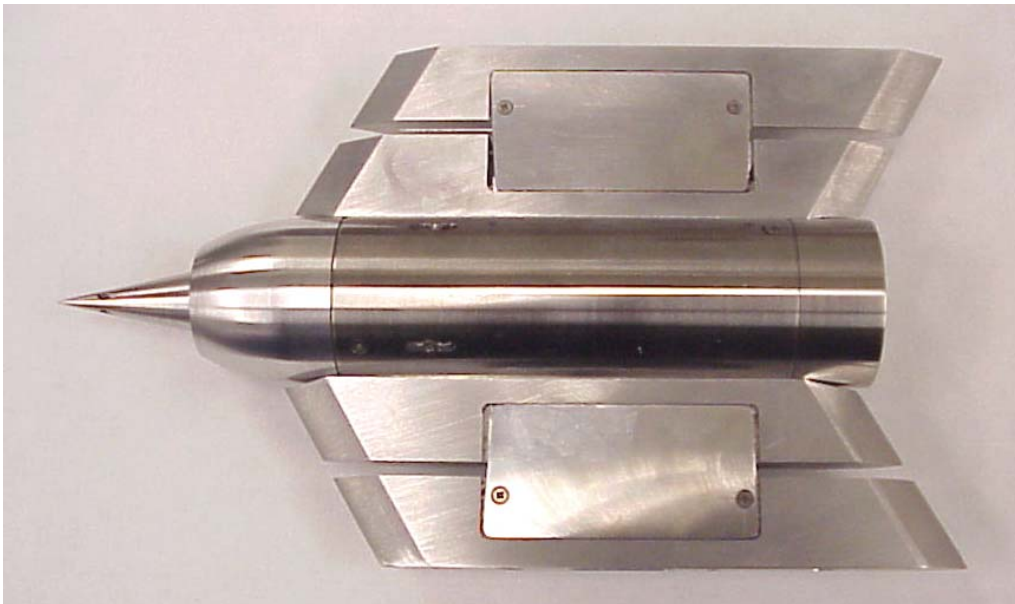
Assembled ramjet with cover plates prior to wind tunnel testing.
